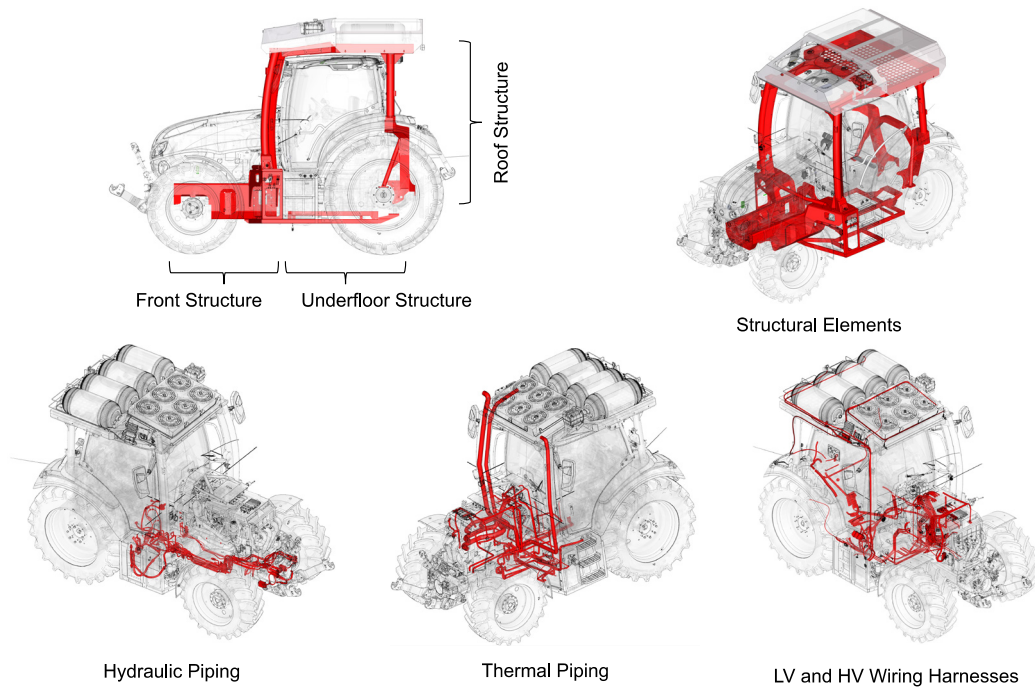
New introduced structural elements for mechanical strength, new hydraulic and thermal piping, and new LV and HV wiring harnesses
